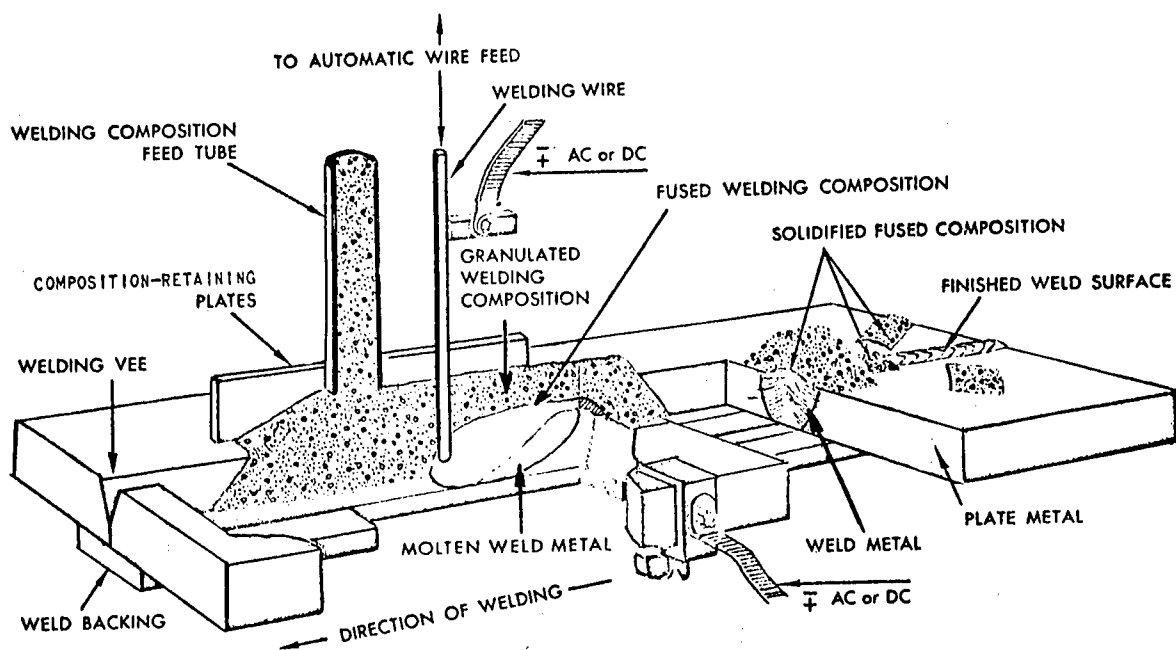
Welding Zone in Submerged-Arc Welding
